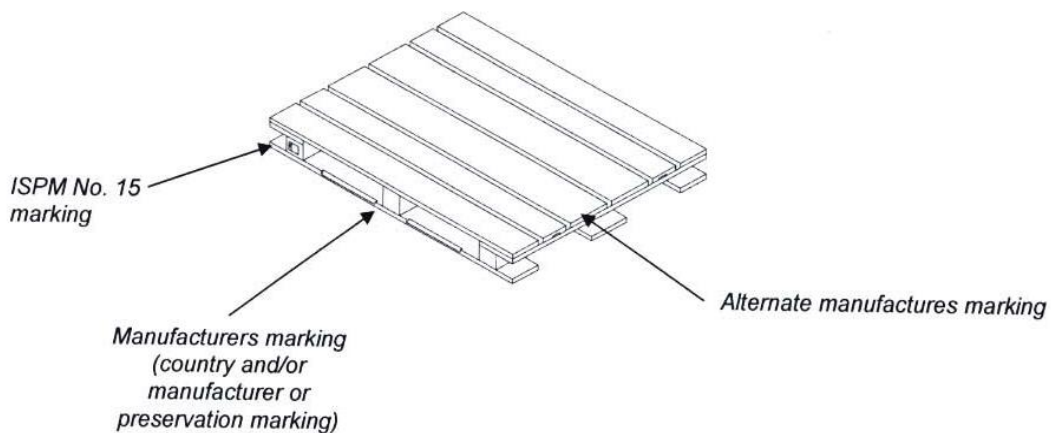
Typical Marking Locations (see Figure 2-4 for typical EUR pallet markings)
